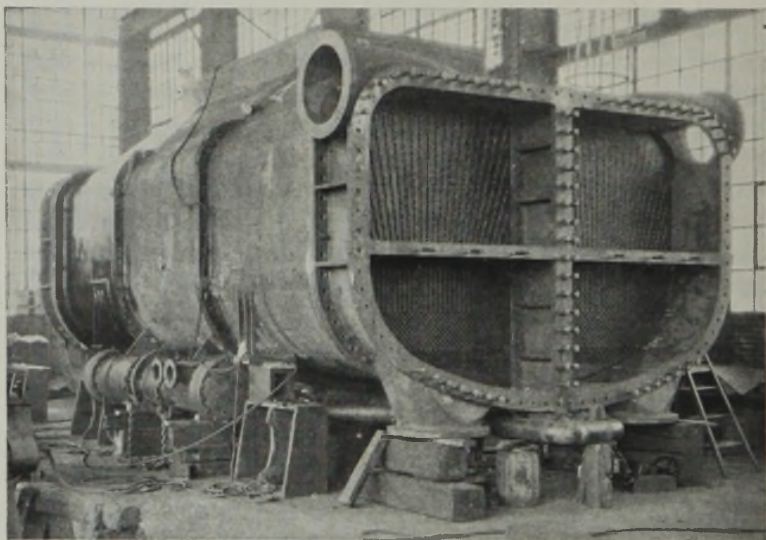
20,000-sq-ft Foster-Wheeler two-pass surface condenser with divided water box.
